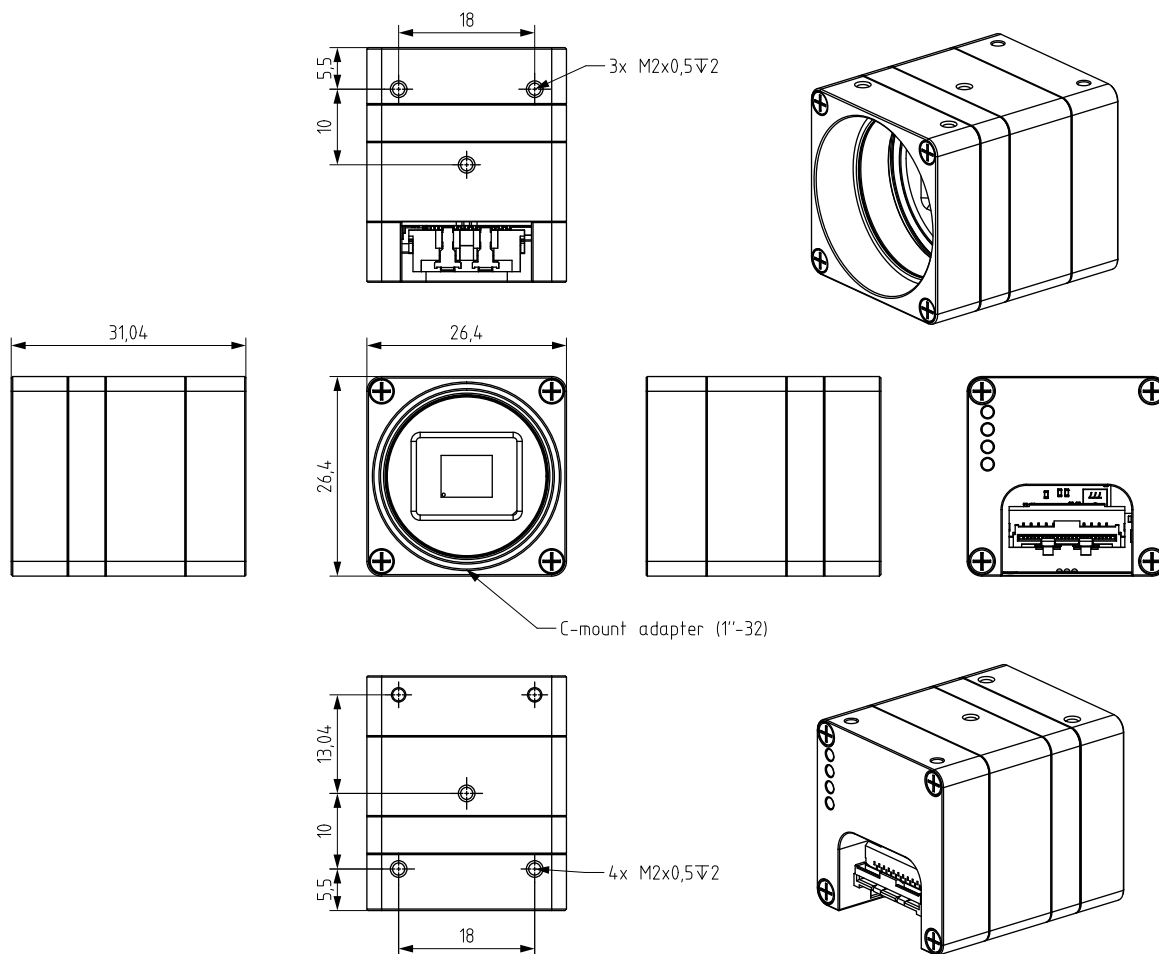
Dimensional drawings of MX051/081/124xG-SY-PG4-X2G2-FV
